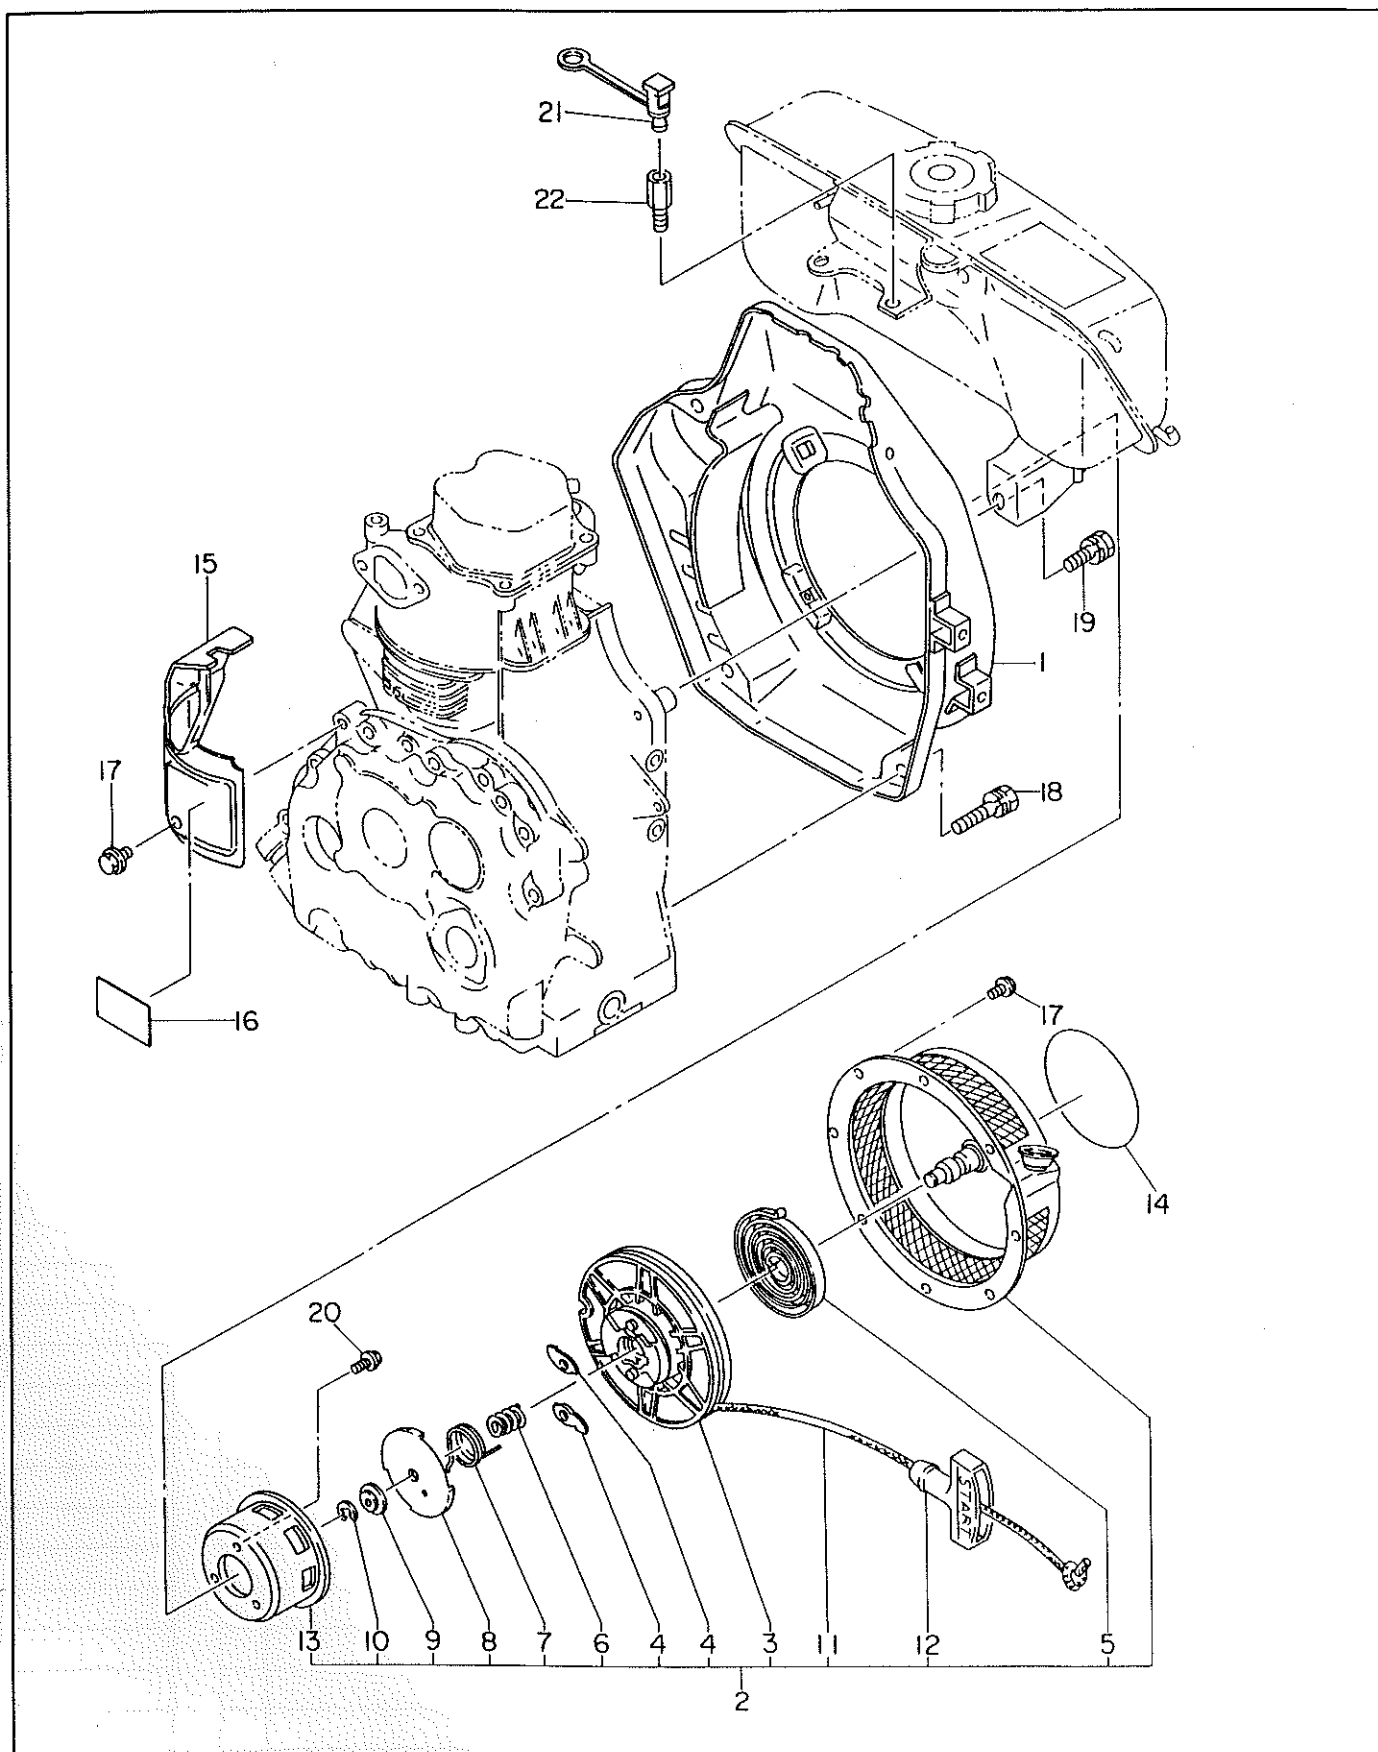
BLOWER HOUSING and RECOIL STARTER GROUP
